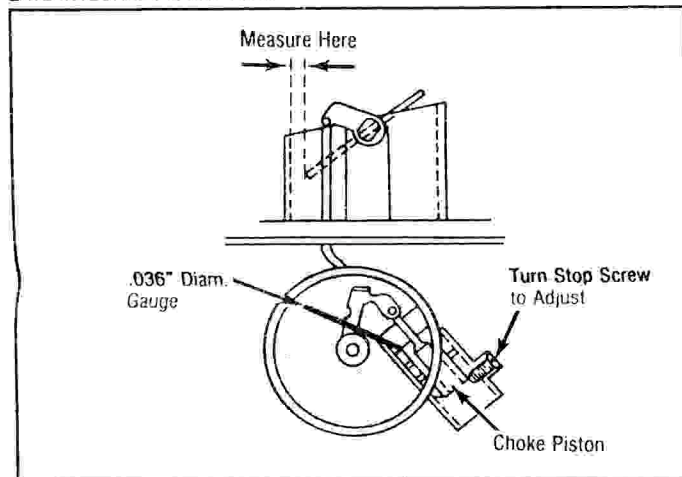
Choke Pull Down Adjustment (Late Integral Piston Type)
